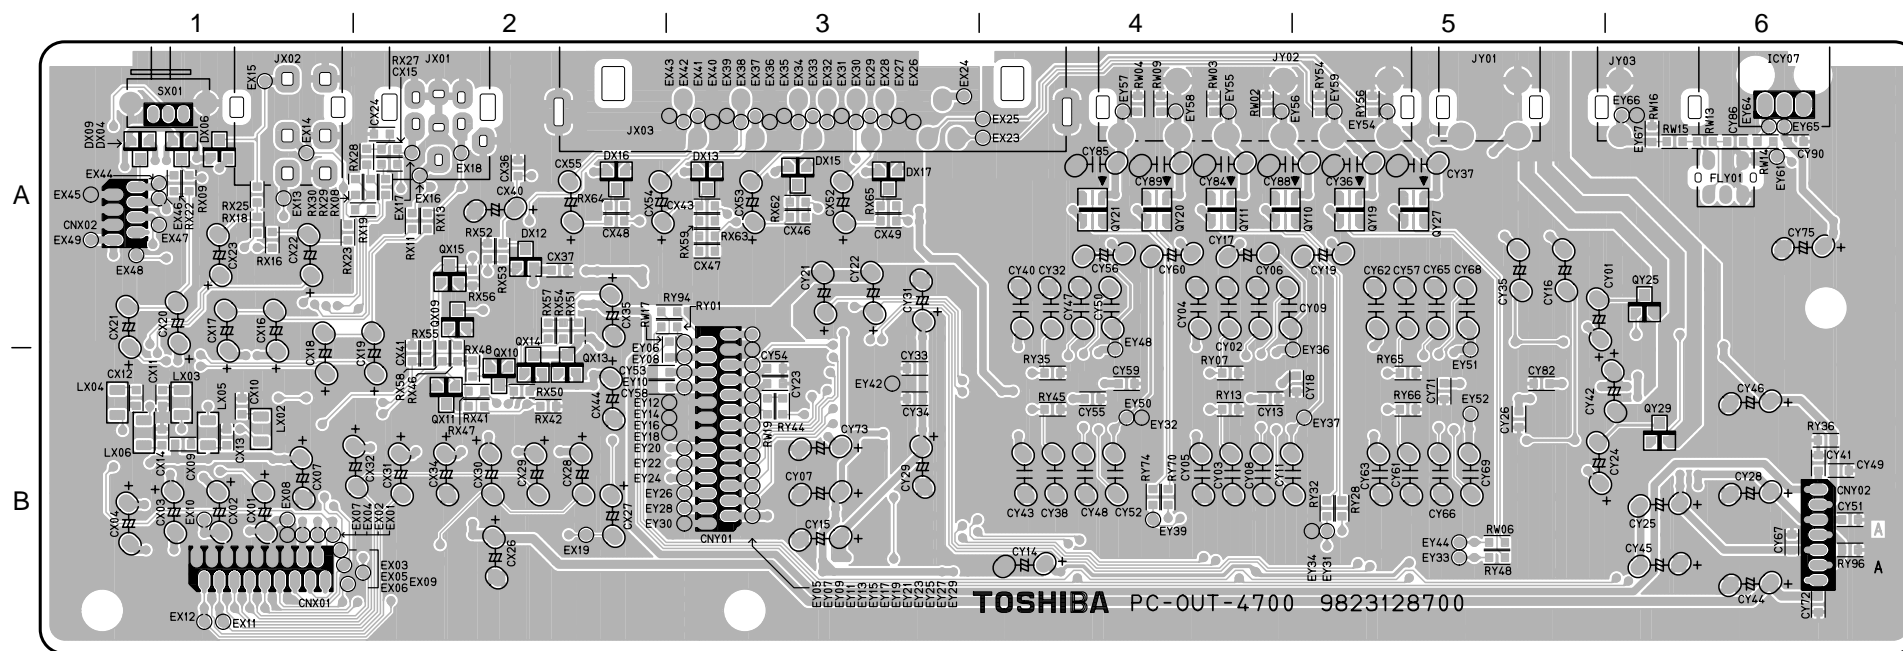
EU05 Output PC Board (Bottom side)
